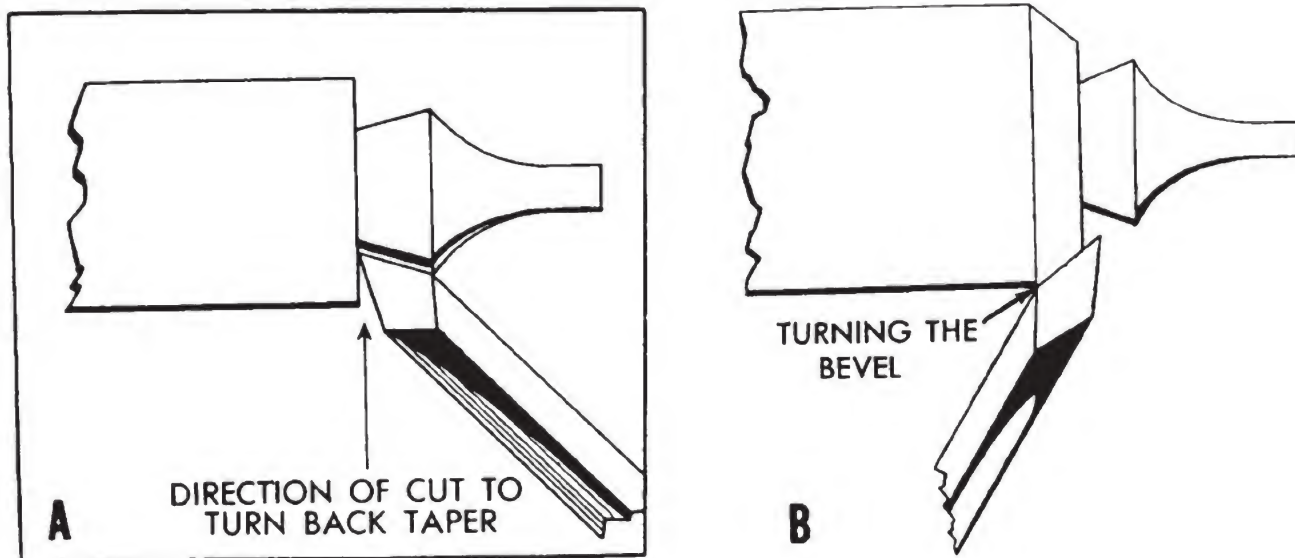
Putting a back taper on the cone, and turning a bevel on the collet shoulder.
